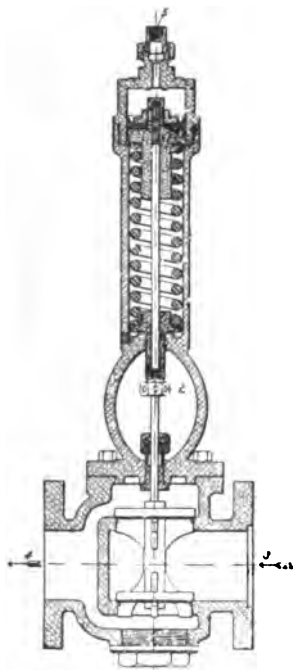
The Witt pump governor. It controls the running of a pump and will hold a steady pressure on the discharge line.
